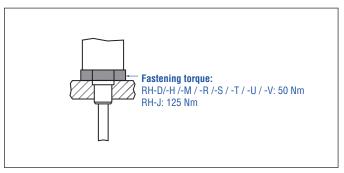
Mounting example of threaded flange »D«, »H«, »J«, »M«, »S«, »T«, »U«, »V«, »R«
